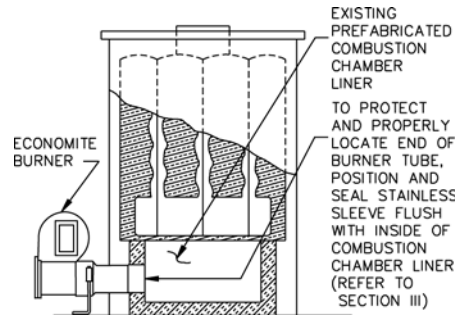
Dry Base Boiler with Combustion Chamber Liner (Warm Air Furnace Construction is Similar)
